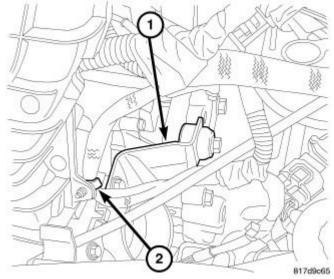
Crankshaft Position Sensor (CKP) Wiring Harness Connector Courtesy of CHRYSLER GROUP, LLC
